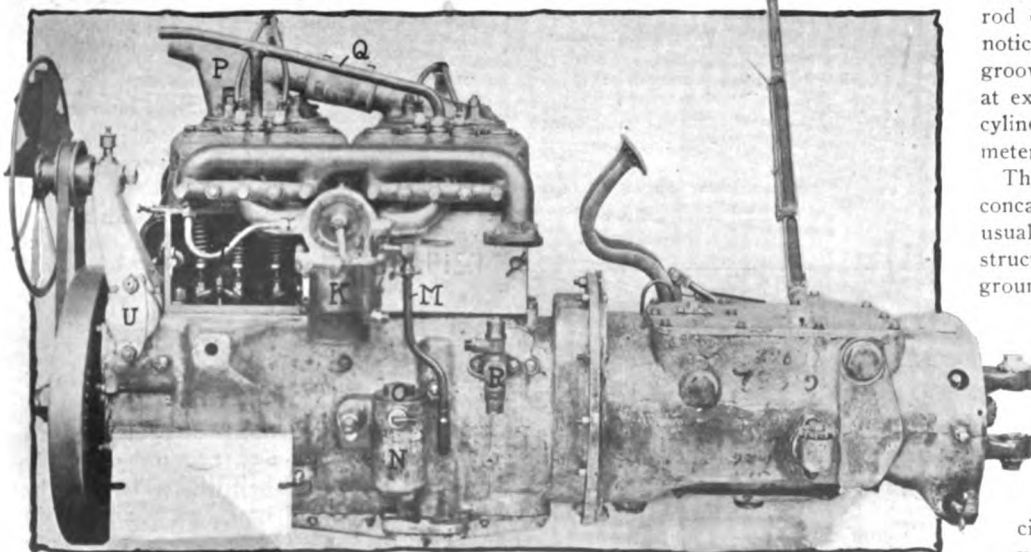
Napier motor. U, cover plate; K, carbureter; N, O, oil pump; M, oil by-pass; P, Q, water outlets
